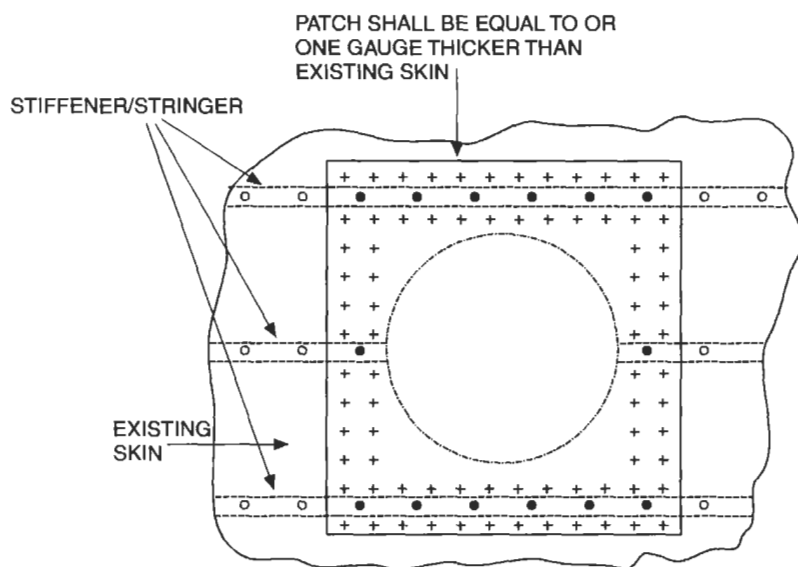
Schematic drawing of mechanically fastened, metallic repair.
